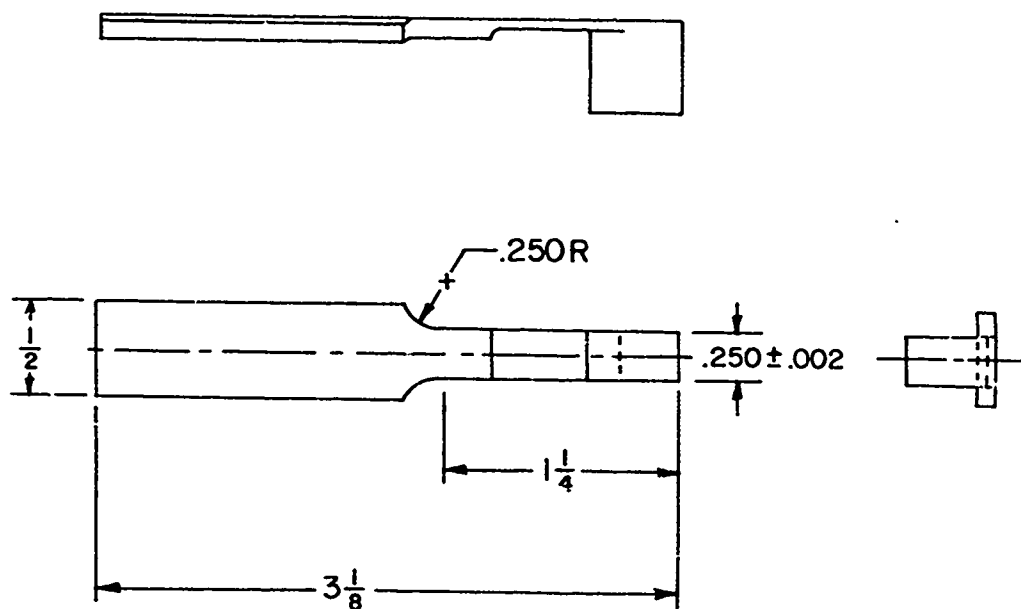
DESIGN OF MARAGING STEEL TENSILE SPECIMEN FABRICATED FROM LONGITUDINAL SECTION OF FRICTION-WELDED TUBES
